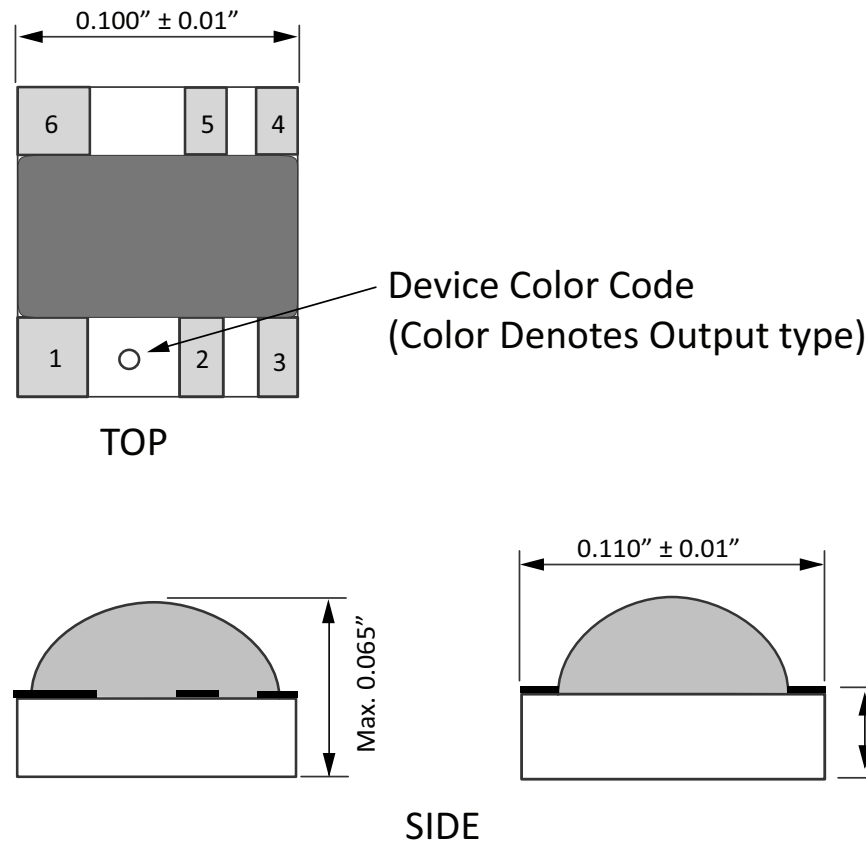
Package Dimensions and Marking, 6-Lead Glob Top for Hybrid Assembly
